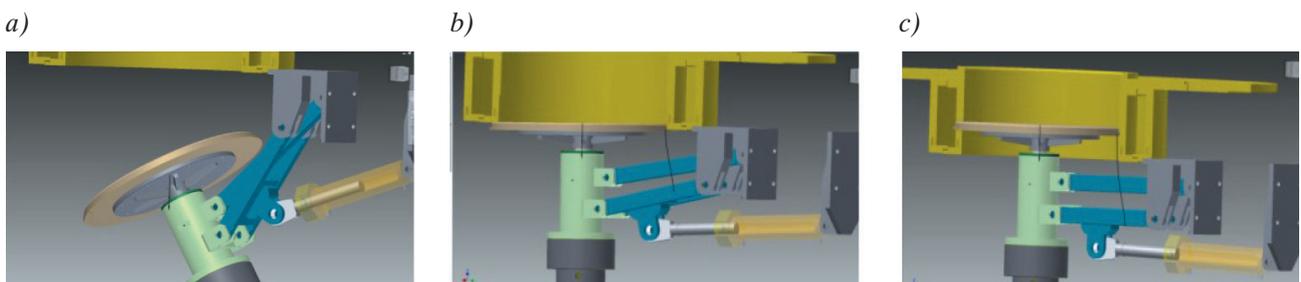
Drum-closing system model in three stages: a) open; b) lower plane of drum; c) closed
